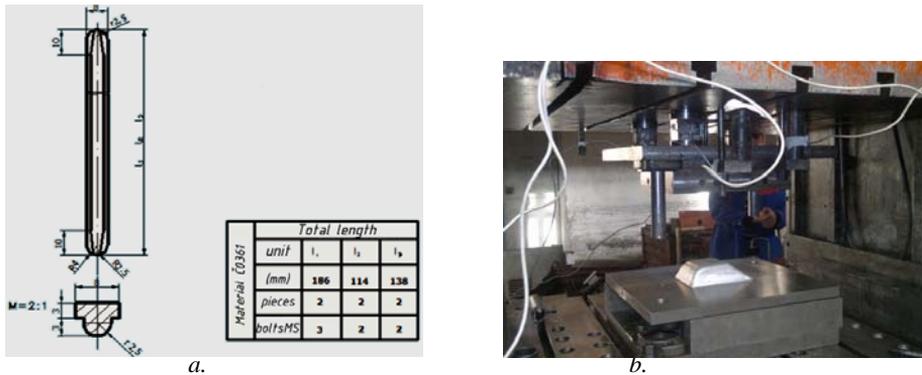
Actual drawbead shape (a) and test drawing tool assembly (b)
